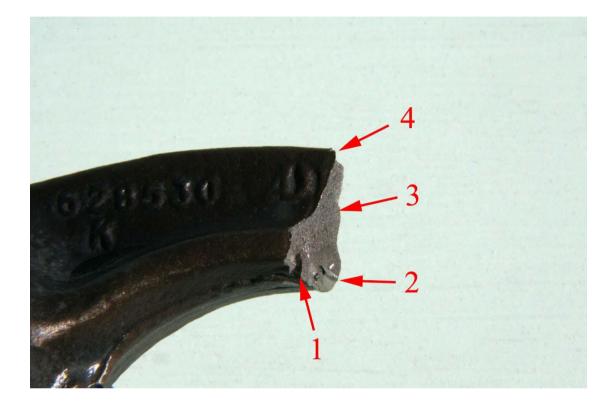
Oblique view of features evident on the main arm fracture surface. Arrow 1 indicates a dark area in an axial plane. Arrow 2 indicates smearing metal on the fracture surface. Arrow 3 indicates the main fracture surface. Arrow 4 indicates a shear lip.
